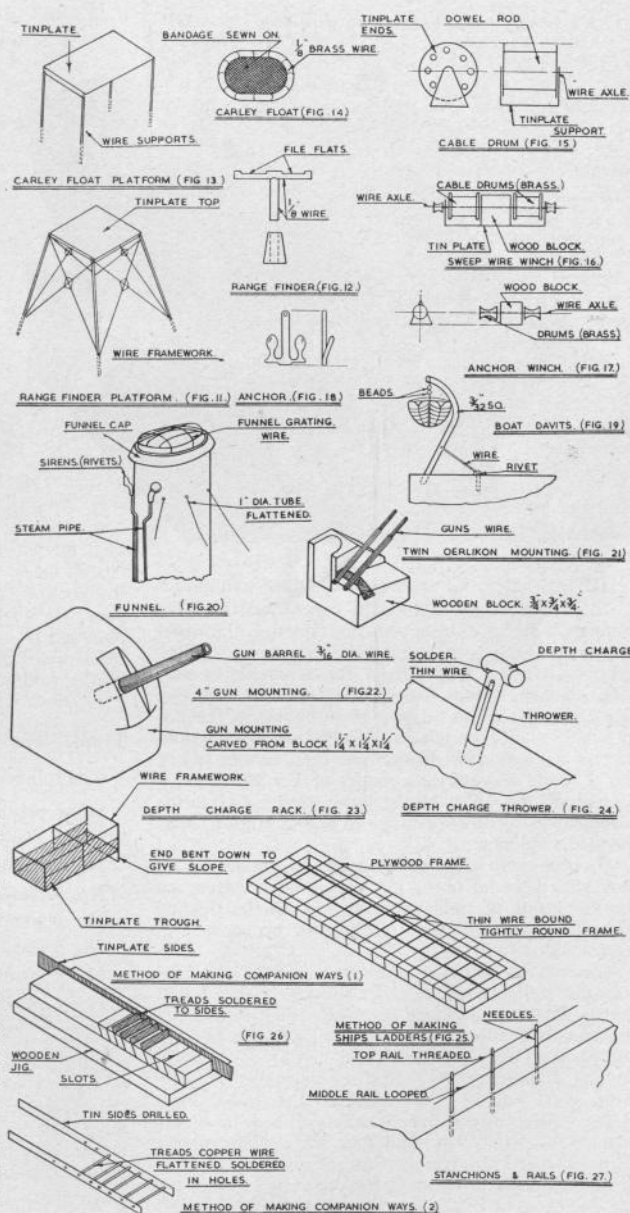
Two methods are shown in the sketch. The first method is to cut the treads and sides from thin tinplate and fit them in the jig as shown. They can then be soldered together. Another method is to cut the sides and drill a series of holes in them. Short lengths of copper wire are then flattened, let into the holes and soldered as shown. A hand rail is bent up from fuse wire and soldered into position.
